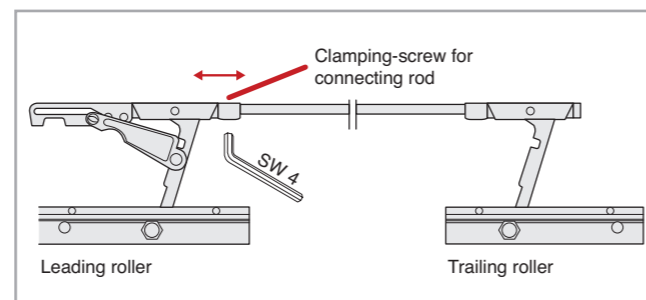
Adjust by loosening / tightening the clamping screw on the leading roller positioned on the bottom rail.
